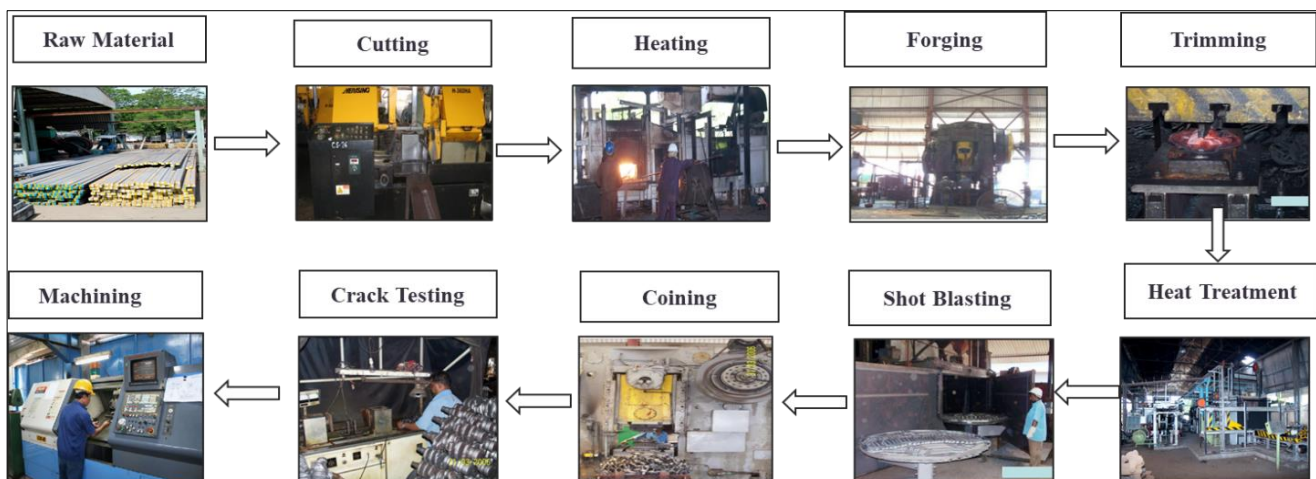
The Steps Involved in the Production of a Crankshaft. Source: [19].
